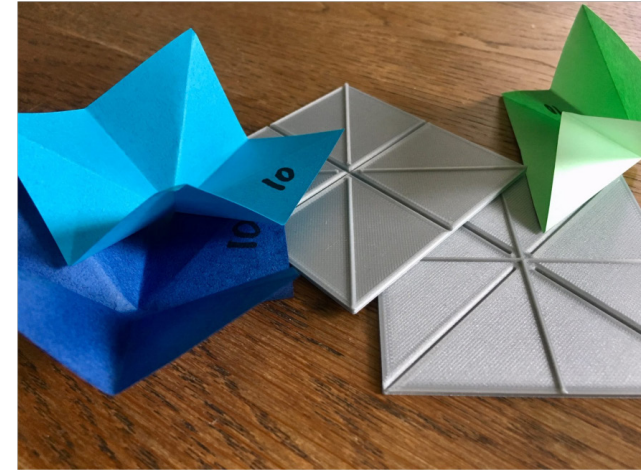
The CNT sheet processing combining with a mold-press that allows the sheet to deform after sheet manufacturing
